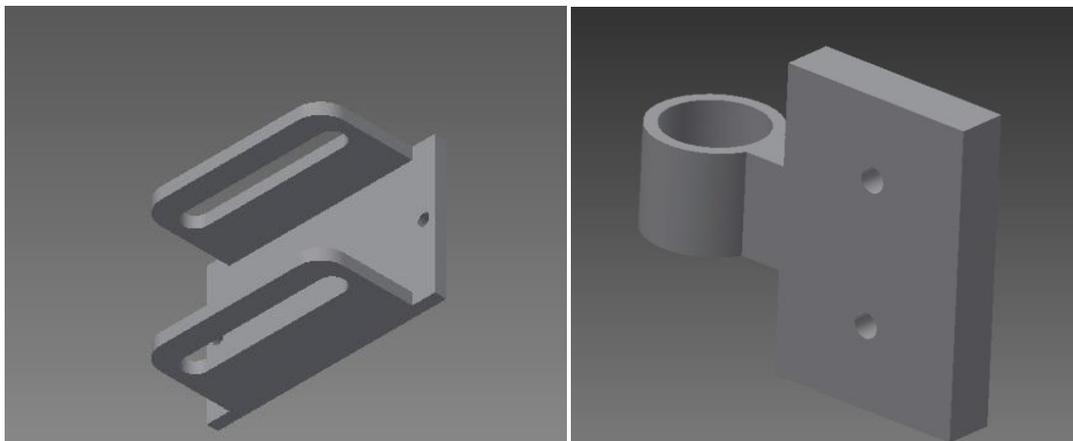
[Left] Hinge that will be screwed onto airbrake panel. As the rod pushes the panel outward, the pin through the rod will slide along the slits seen here. [Right] Hinge that connects the airbrake panel to the bottom disk in Figure 3-7.
